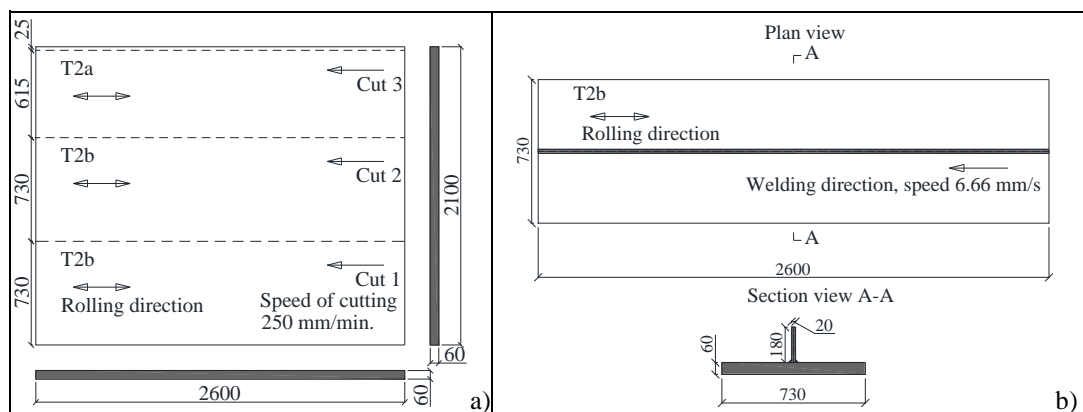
a) Plan view of flame cutting sequence and b) plan view and cross section of web-flange welding (in mm)
